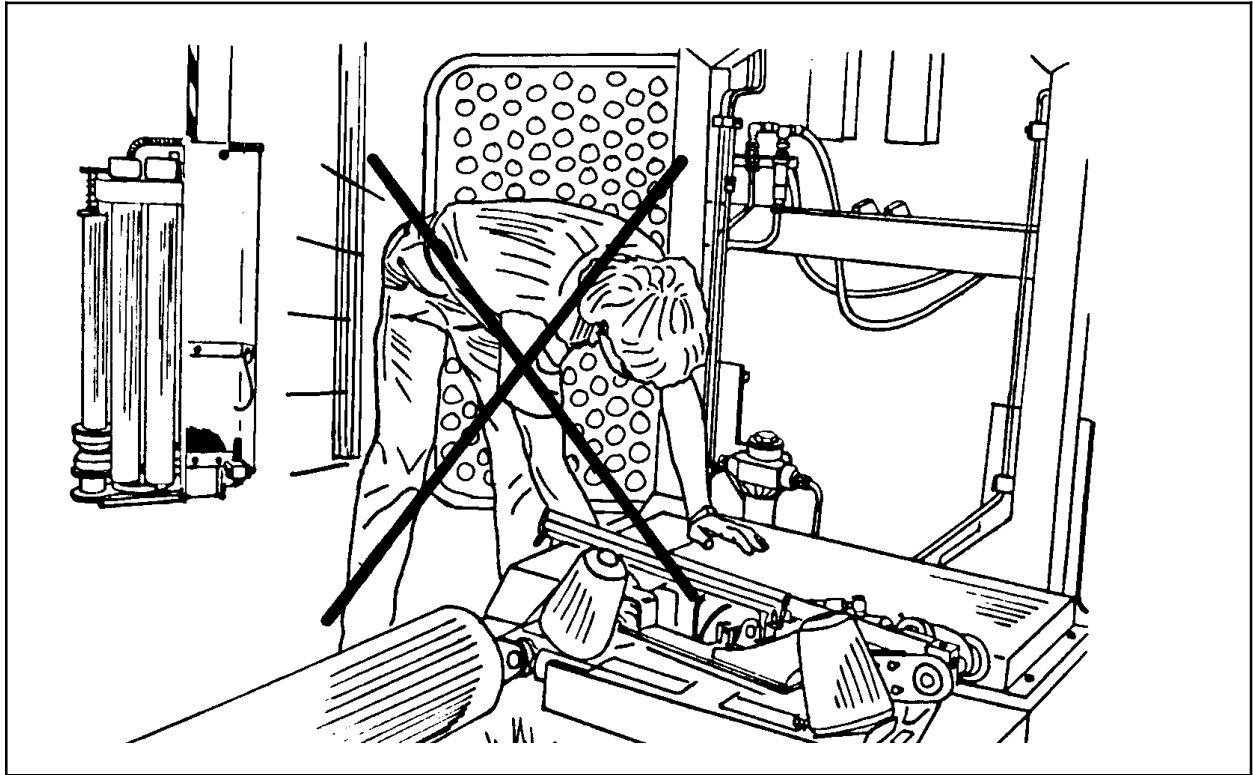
BEWARE OF MOVING PARTS WHEN TESTING THE MACHINE.
